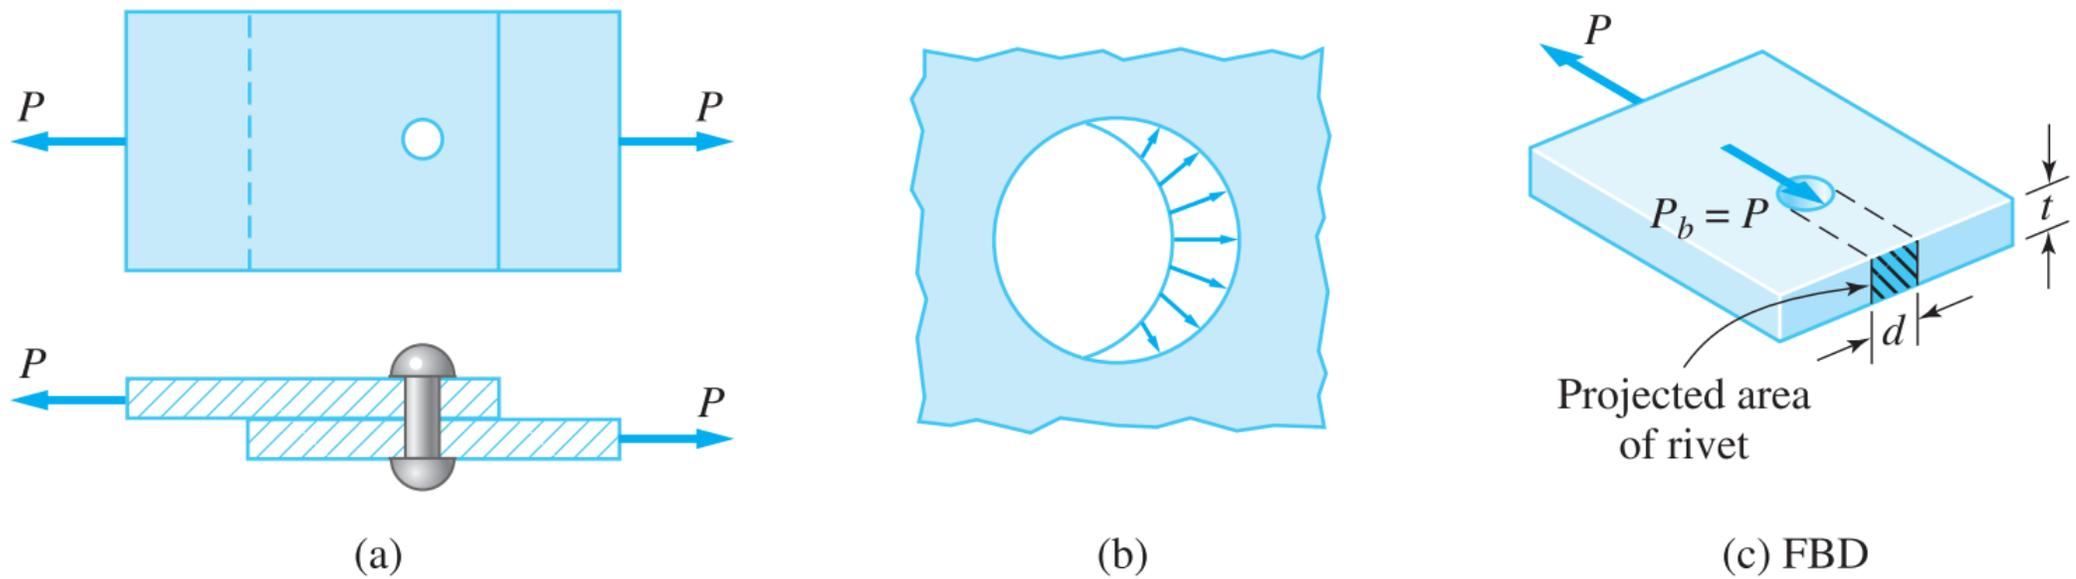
FIG. Example of bearing stress: (a) a rivet in a lap joint; (b) bearing stress is not constant; (c) bearing stress caused by the bearing force P_b is assumed to be uniform on projected area td .
